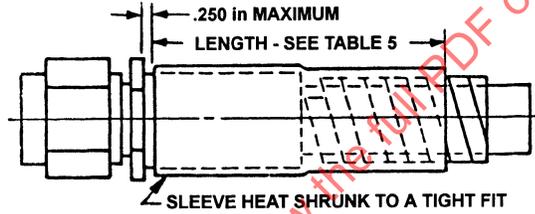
TUBULAR/COIL ABRASION END /10/ /11/
